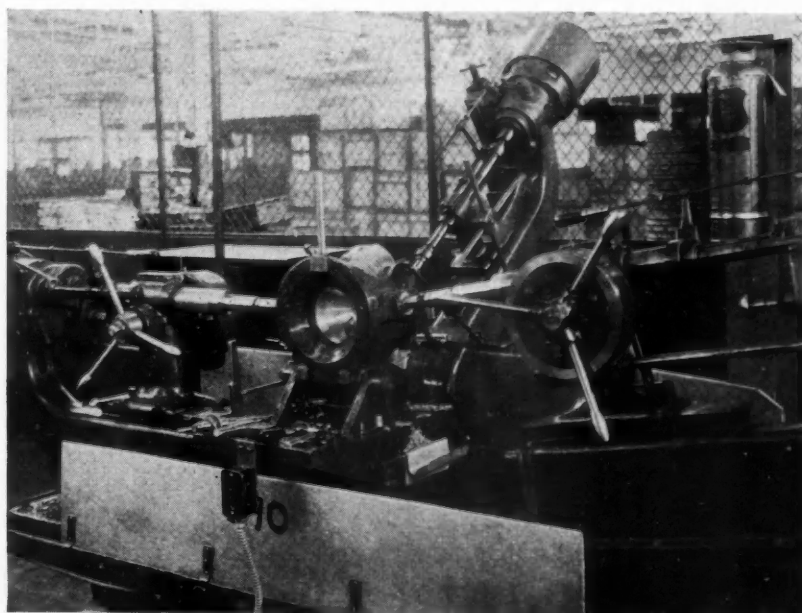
Three-head Leland-Gifford drill for cylinder head operation + + +
